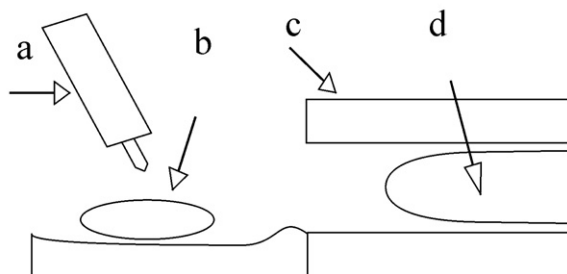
An illustration of the used casting setup with (a) arc melting electrode, (b) molten alloy, (c) mold and (d) core. In casting the setup is tilted clockwise to pour the melt into the mold.
